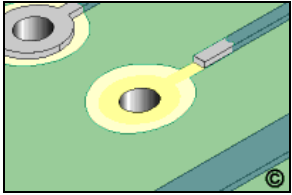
Remove the defective land and soldermask from the connecting circuit.
